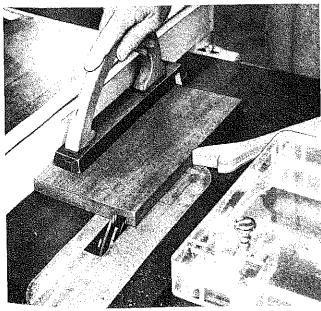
Cutting a groove with a dado head. (Guard is removed to view the operation.)
